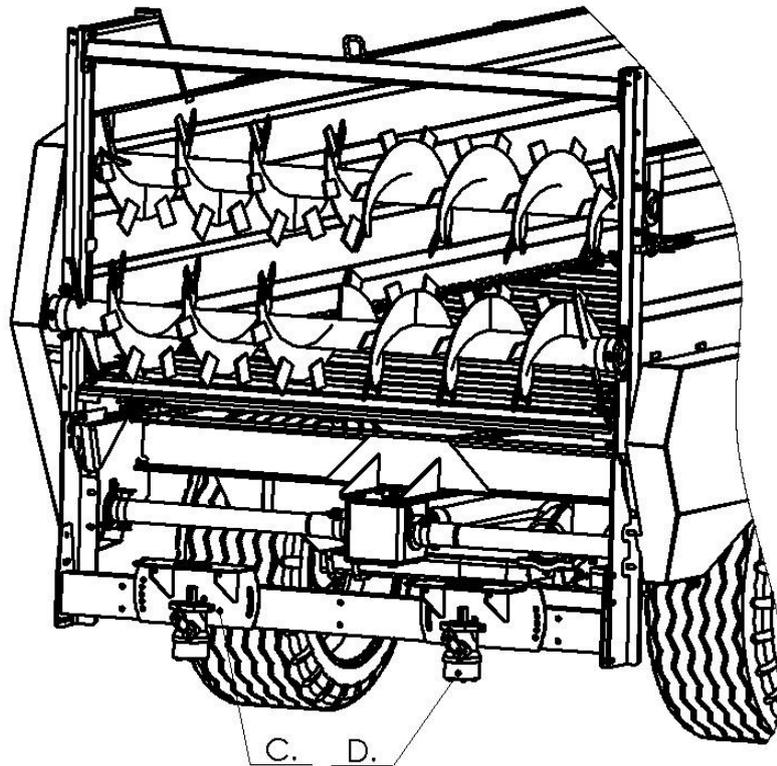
Step 3 - bolt motor holders (C) to the channel bar and mount hydraulic motors (D).
